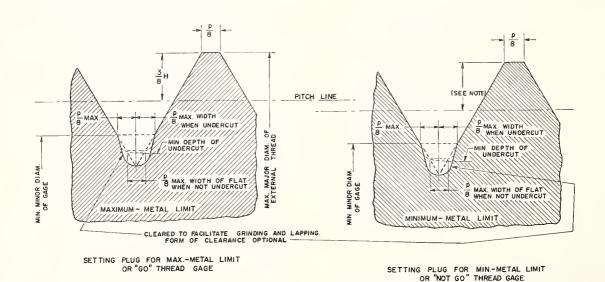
Thread form of basic-crest thread setting plug gages.
